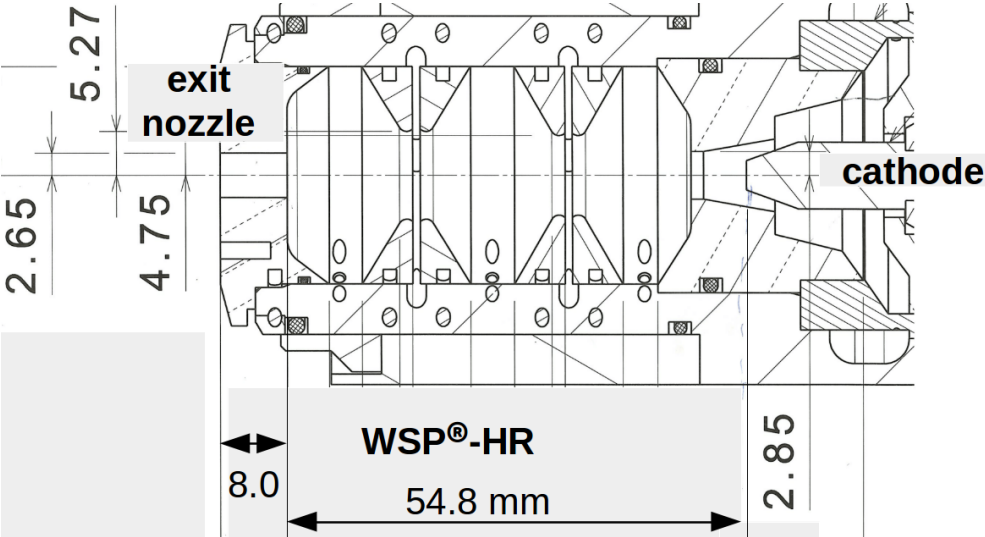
Engineering drawing of axial cross section of WSP®-HR
